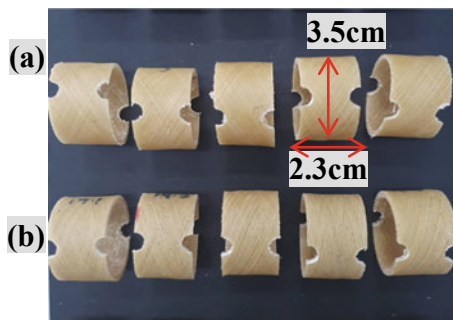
Specimens from (a) vacuum bagging (b) heat shrink tube method
